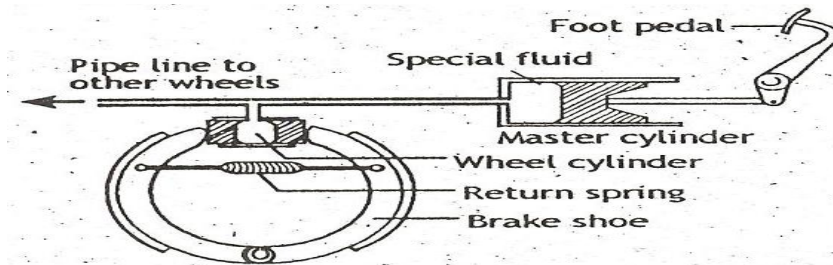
Essential parts of a hydraulic brakes and their working
